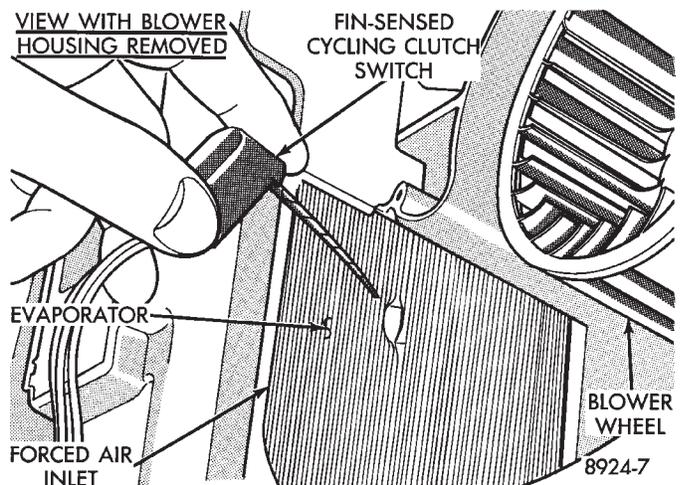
Remove or Install Fin-sensing Cycling Clutch Switch
